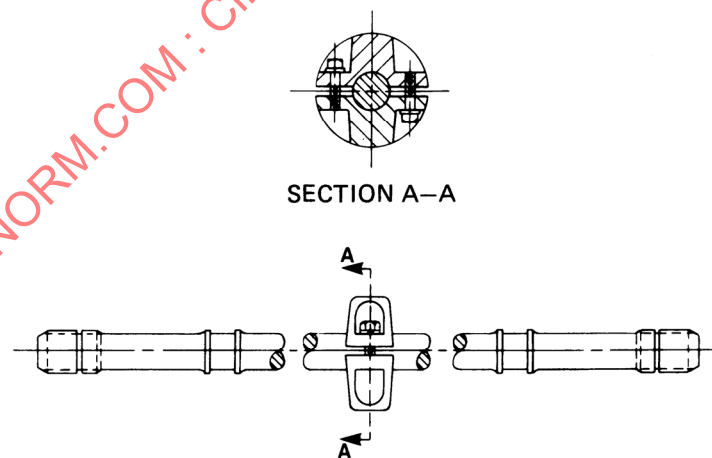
AXLE SHAFT MOUNTED MASS DAMPER
